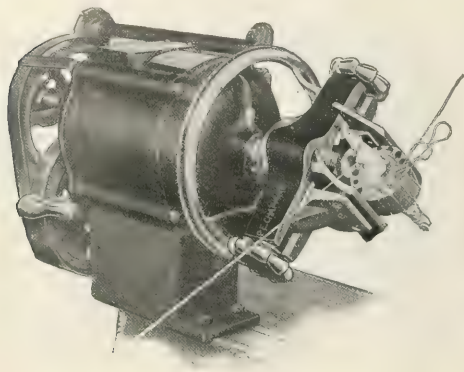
SUGGESTION FOR MOUNTING ARMATURE WINDER
